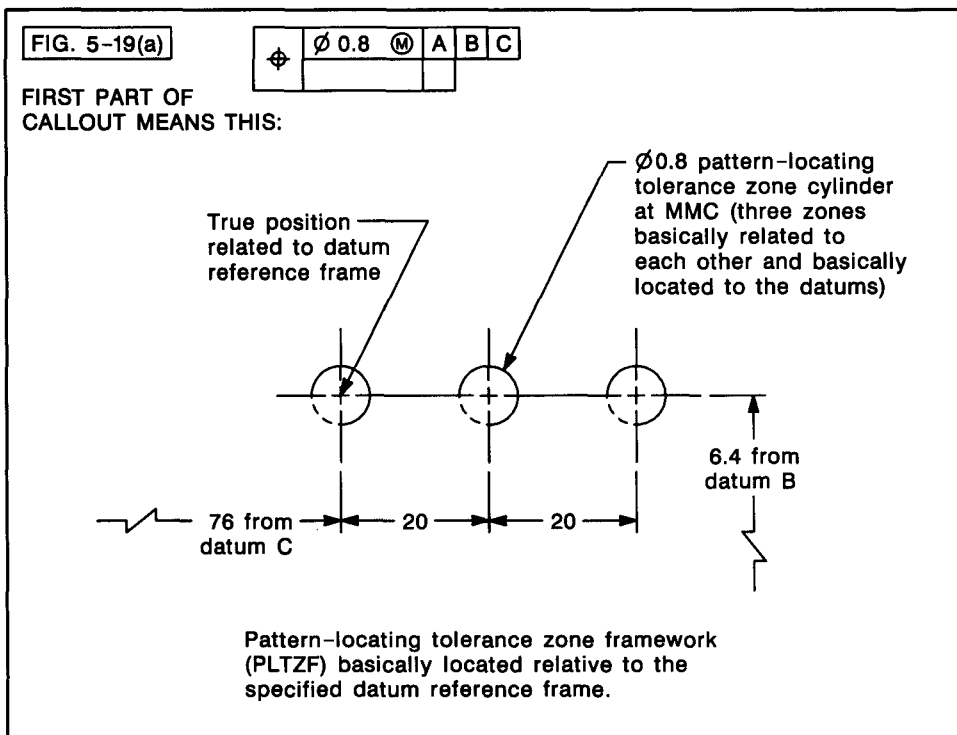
HOLE PATTERNS LOCATED BY COMPOSITE POSITIONAL TOLERANCING (CONT'D)
